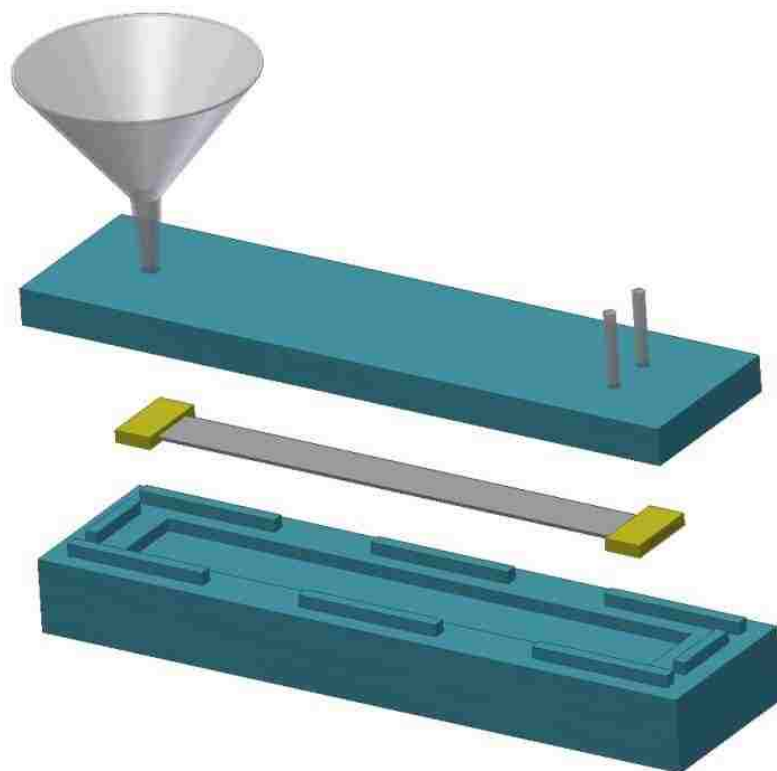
Assembly View of Silicone Mold used for Casting IE-3075 Urethane [8]
